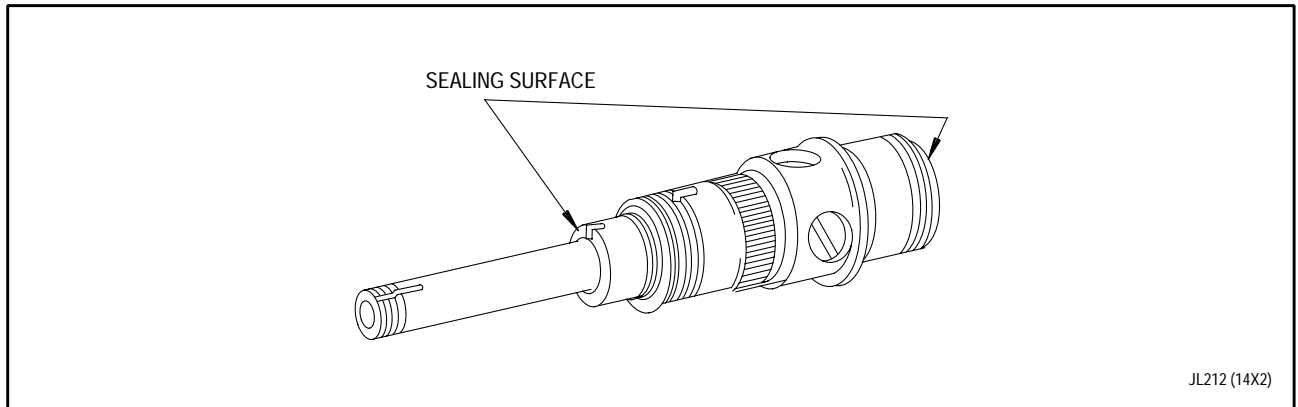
Deaerator Impeller Shaft and Deaerator Impeller and Spur Gear Assembly - Assembly
